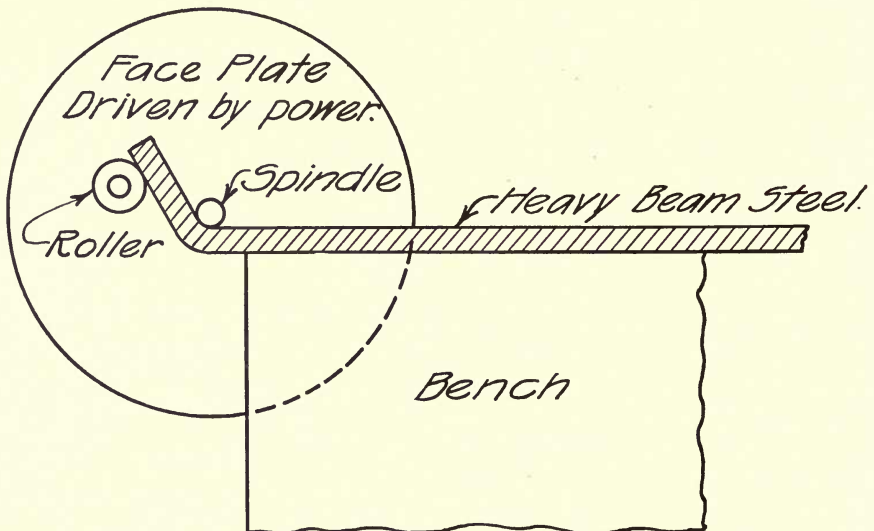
Power Bender for Large Steel Bars. (See p. 98.)
